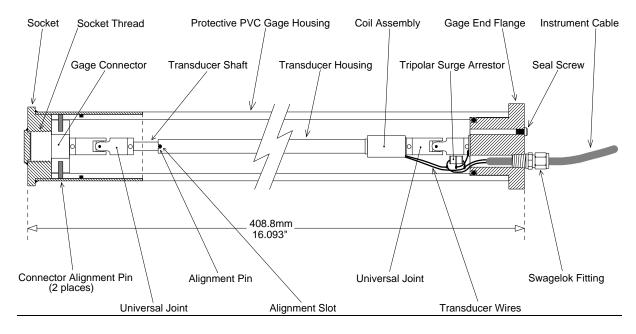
Model 4400 Vibrating Wire Embedment Jointmeter
